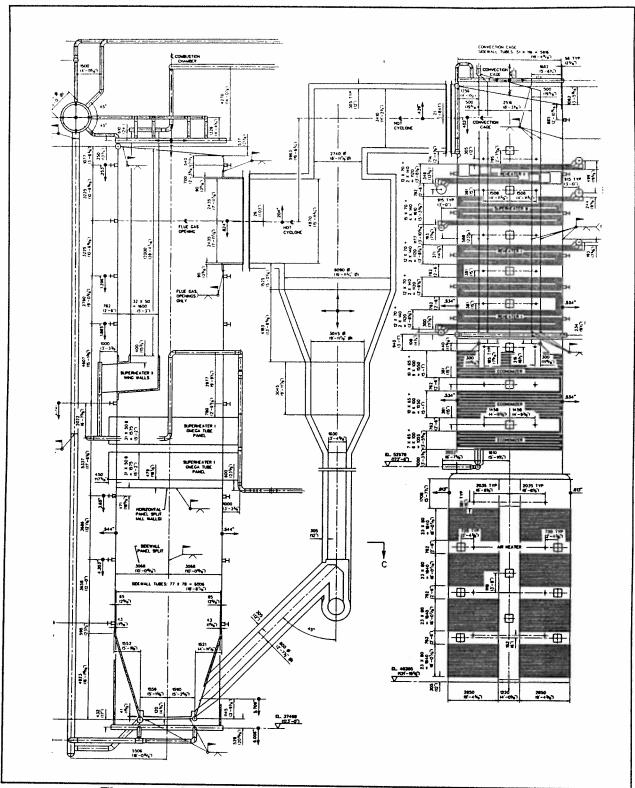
SIDE ELEVATION DRAWING OF YOUR PLANT
